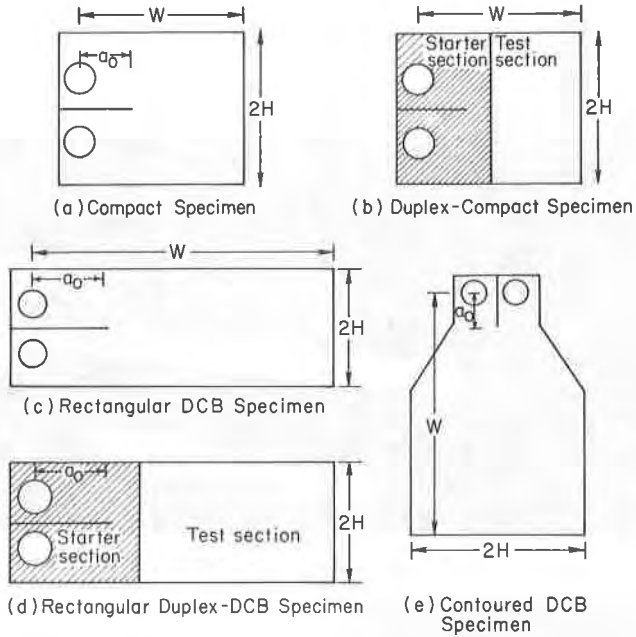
SCHEMATIC DRAWINGS OF POSSIBLE CRACK ARREST SPECIMENS
